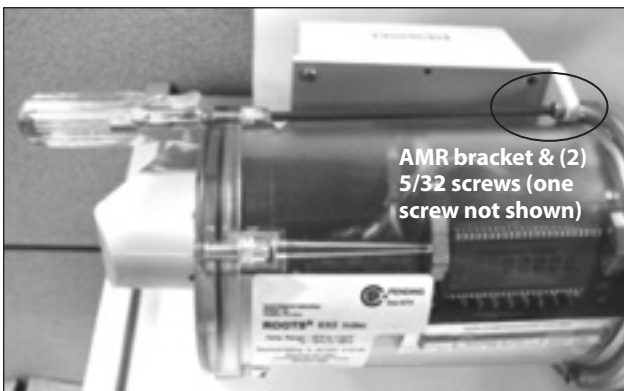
Remove 2 screws attaching AMR bracket to ES3
